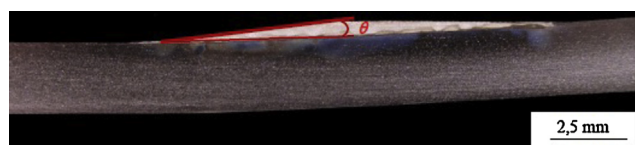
Wetting the titanium base with molten Ag 245 brazing metal, wetting angle 9°.
